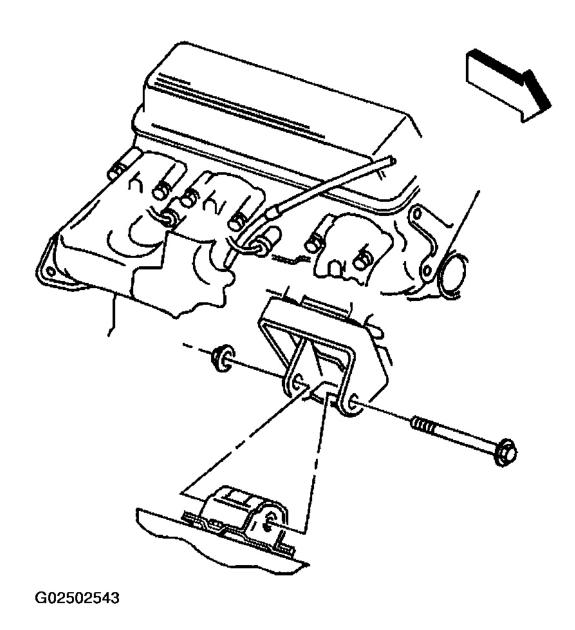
Installing Engine Mount Through-Bolt & Nut Courtesy of GENERAL MOTORS CORP.
